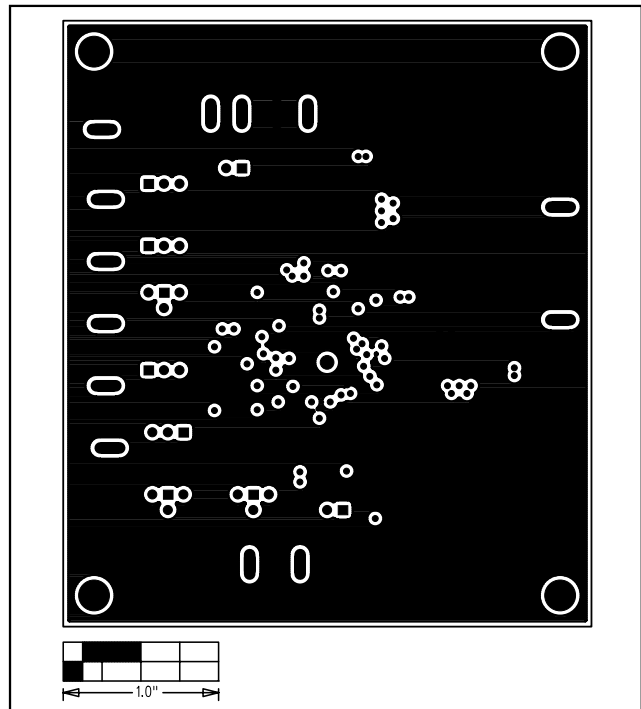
MAX1541 EV Kit PC Board Layout—Ground Layer 2
